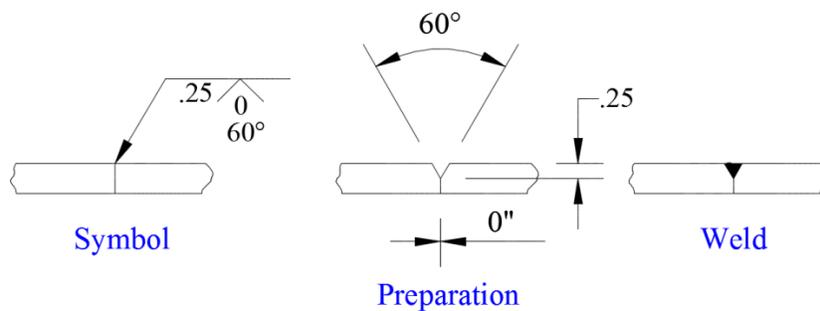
Partial penetration (or partial depth) V-groove weld
